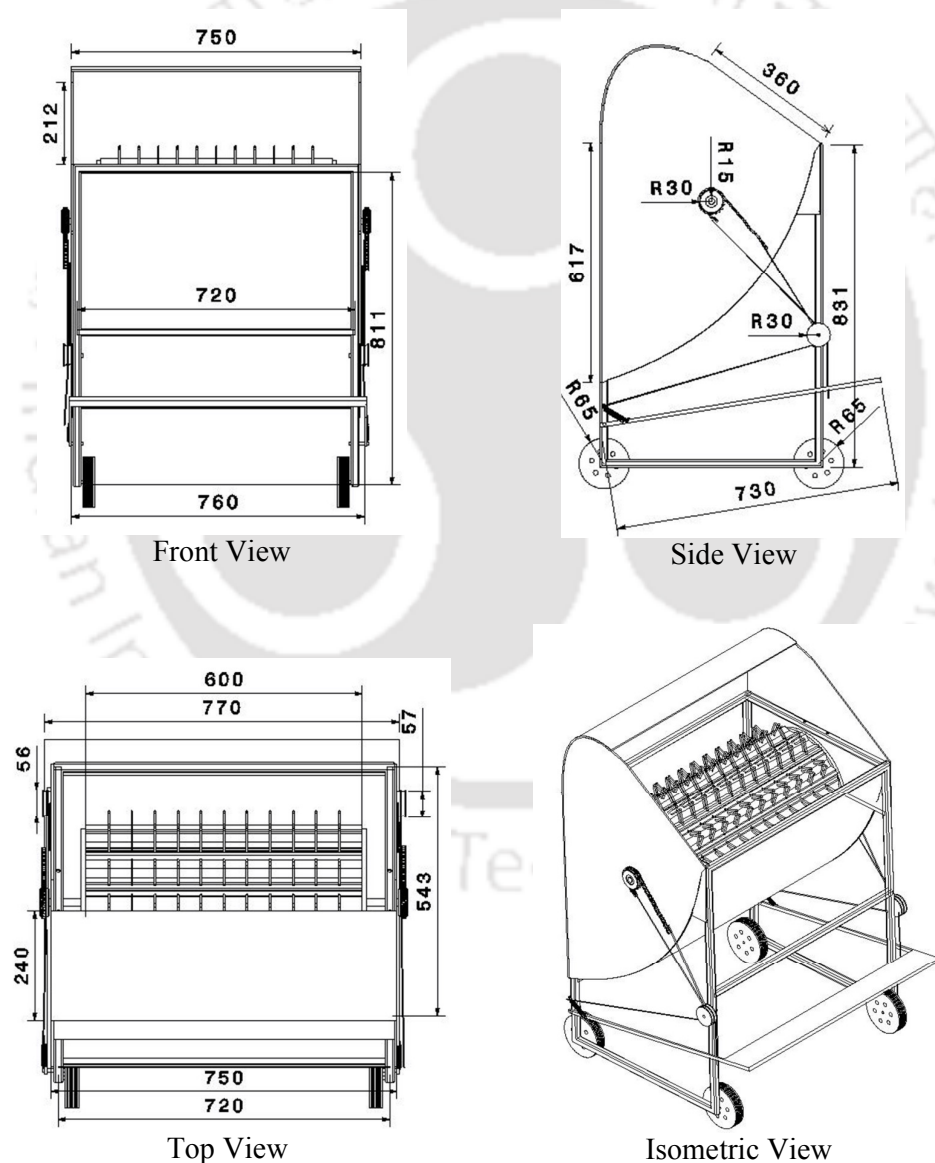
Detailed dimensions of developed pedal thresher (All dimensions are in mm; Scale 1:10)
